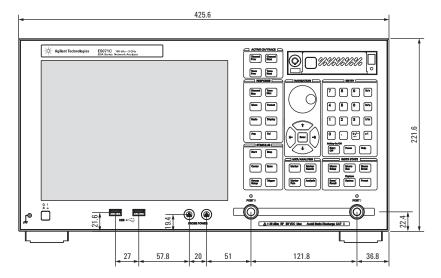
Dimensions (front view, E5071C with option 230/235/280/285, in millimeters)
